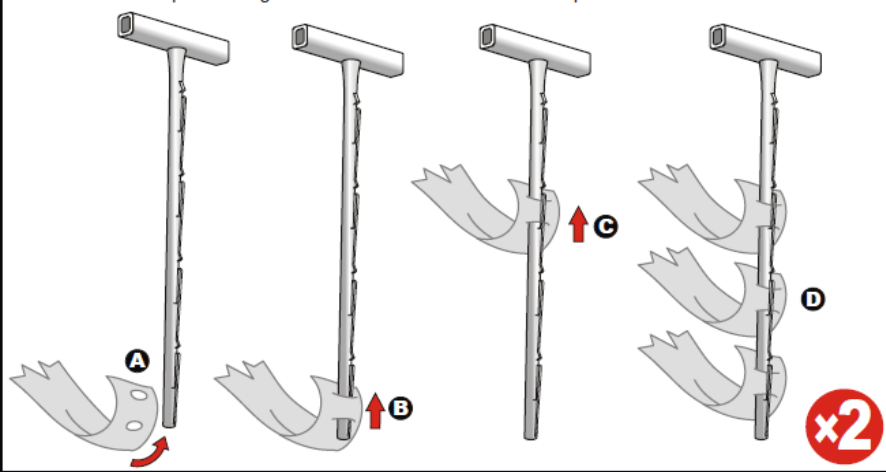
Assembly Instructions for Type II Heater Module with Eggs
